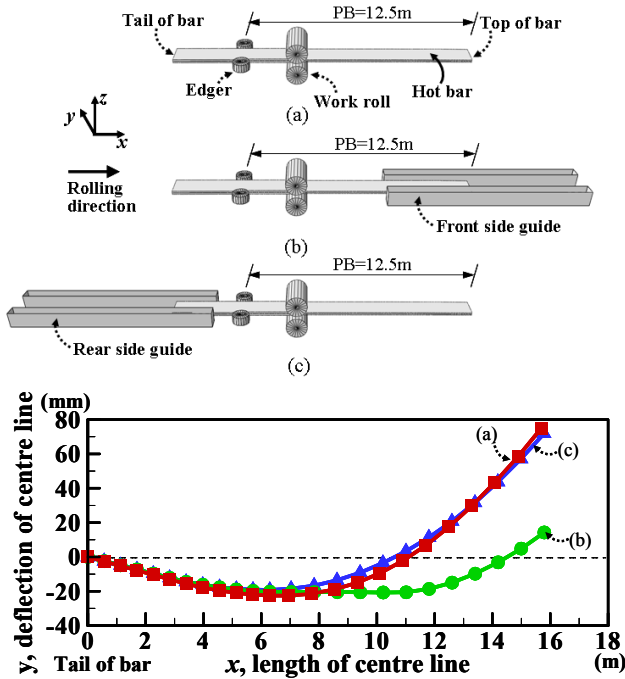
Deformed shape of bar when position of bar (PB) is 12.5m: (a) no side guide is installed, (b) side guide is located in front of stand, (c) side guide is located in rear of stand
